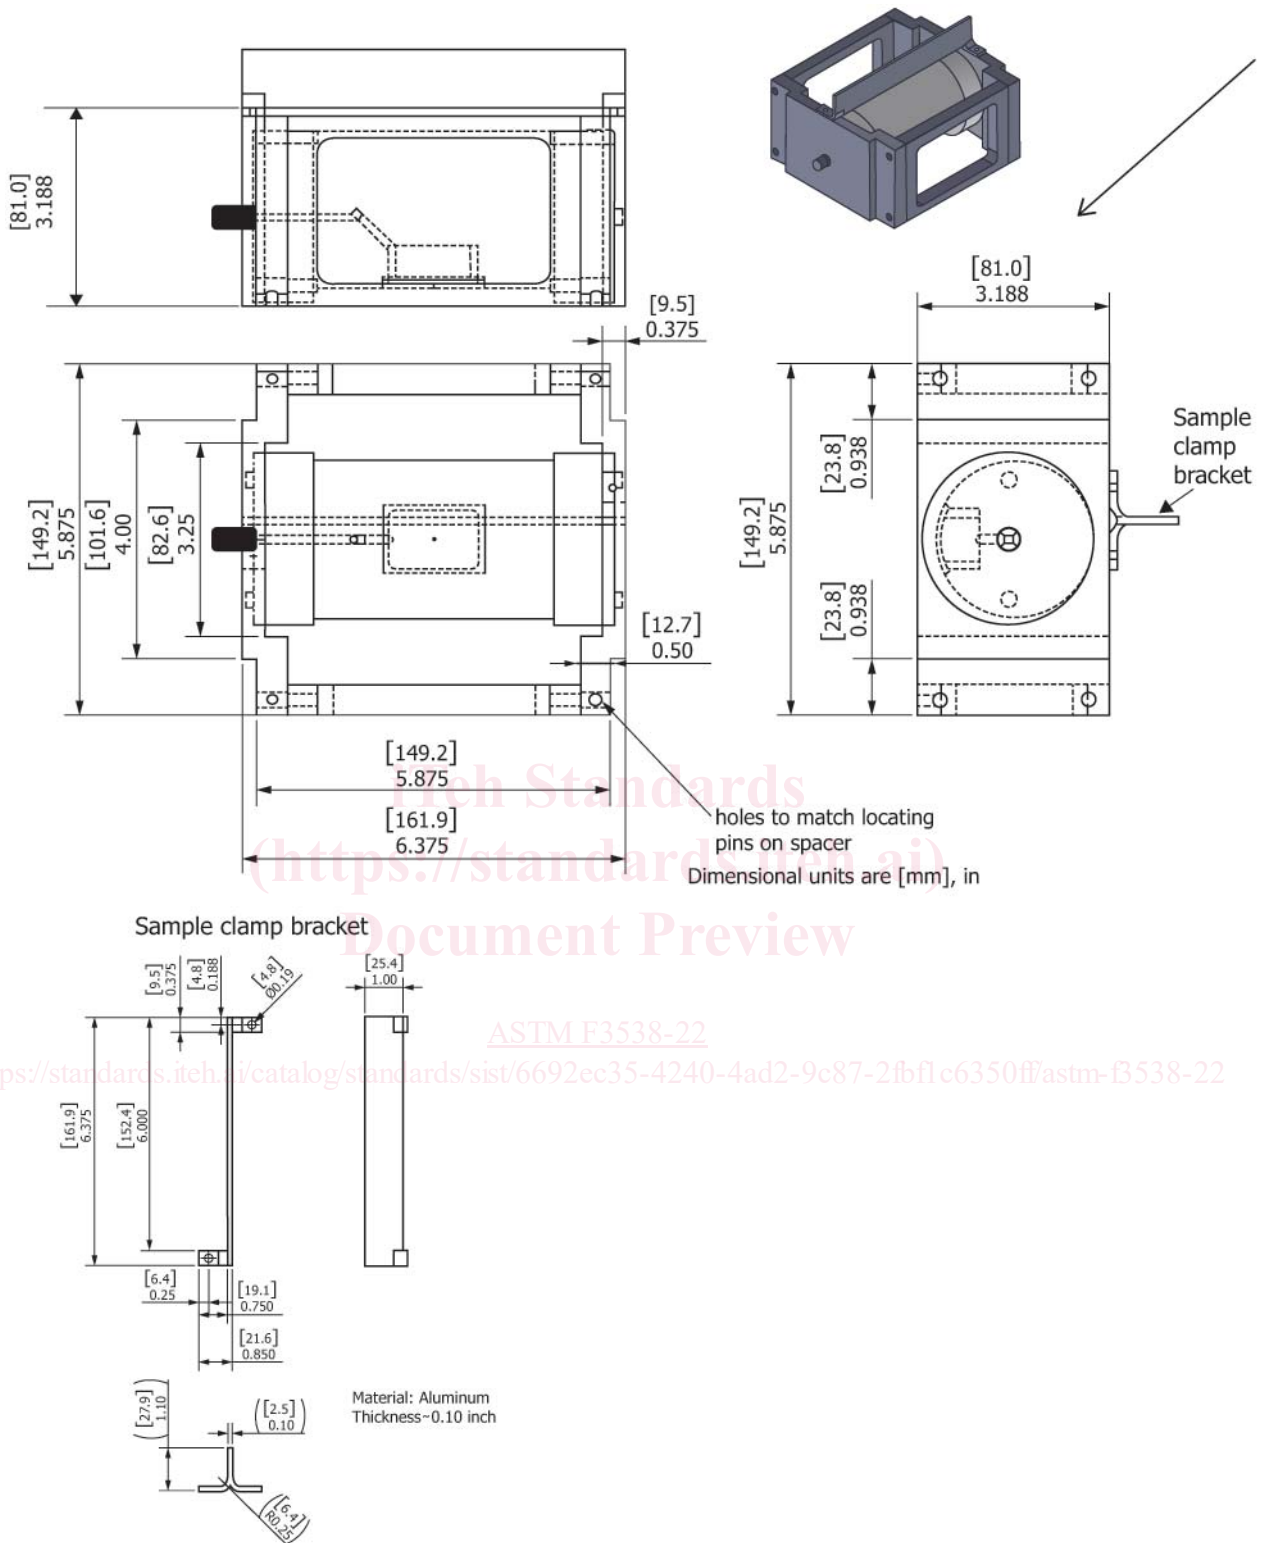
Cylindrical Sensor and Specimen Holder (continued)
